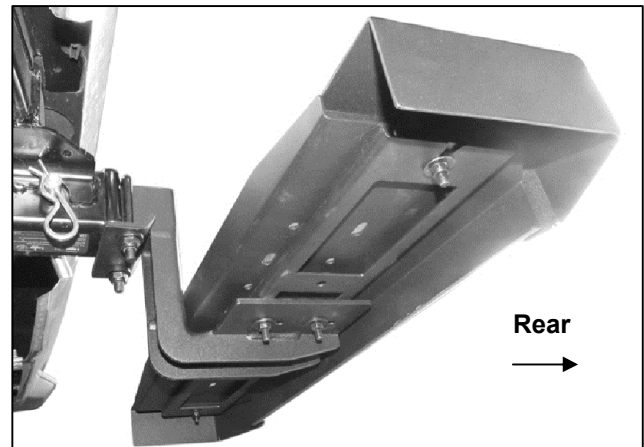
Slide 6mm Double bolt plate in through the bottom of the channel on the Rattler Board
